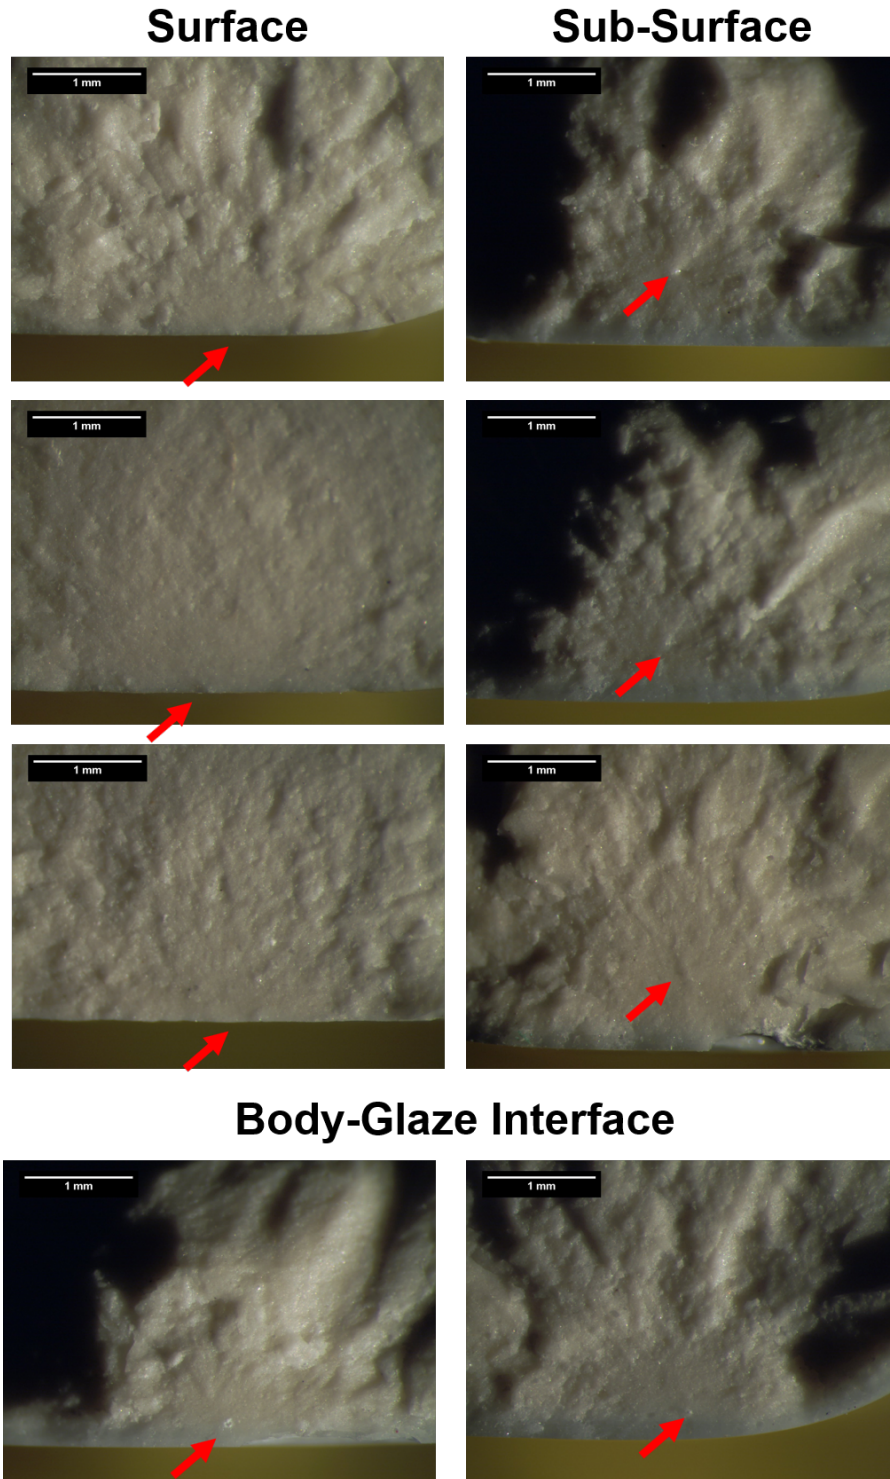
Examples of origins of failure. Surface failures occurred in unglazed samples whereas body failures occurred in glazed samples.
